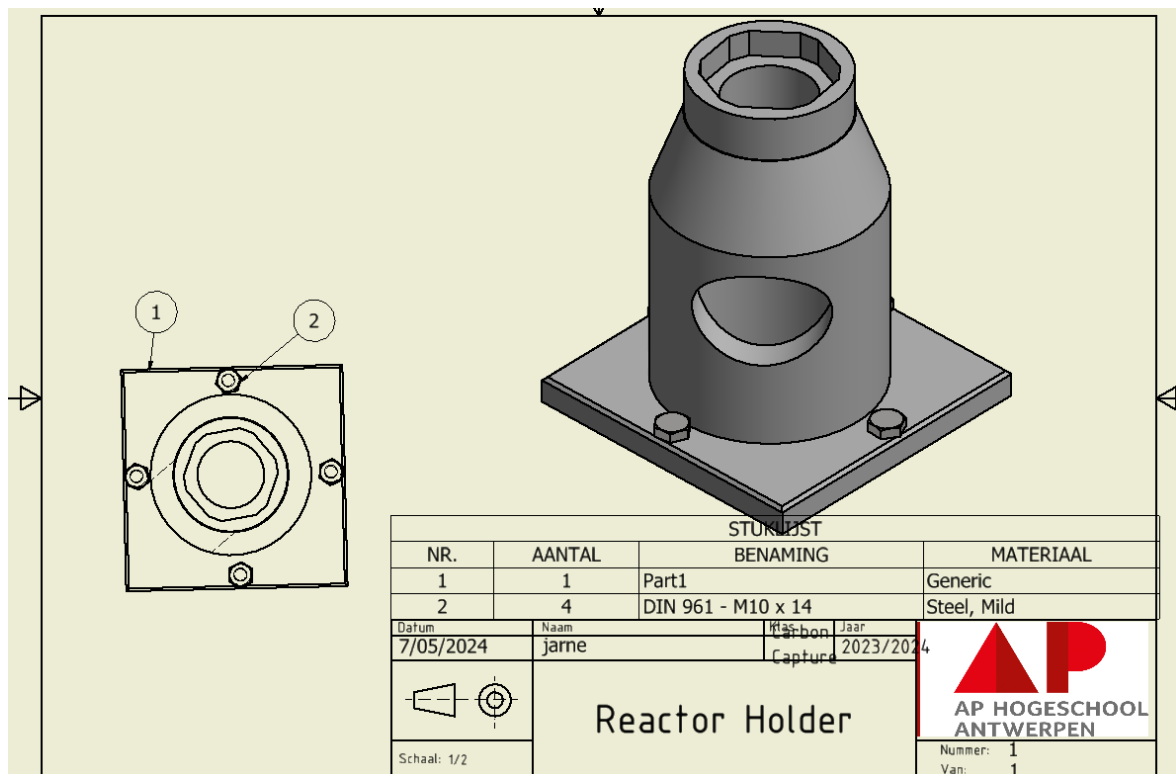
Inventor design of the reactor holder (Heylen, 2024)
